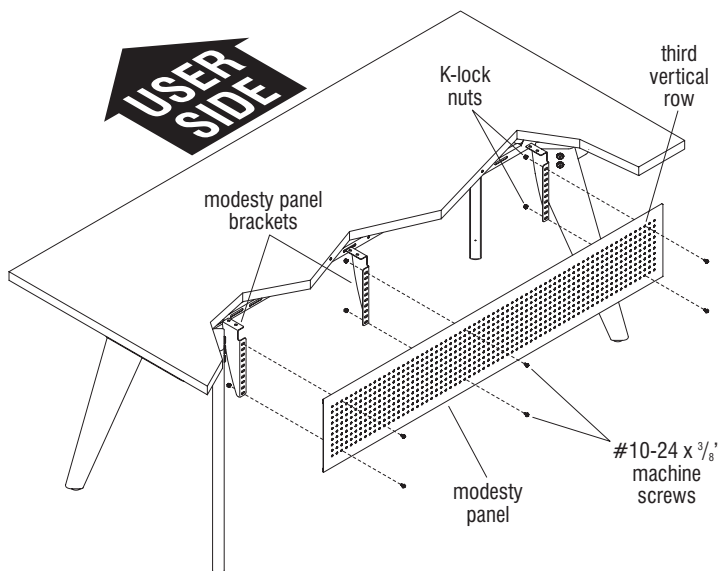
Single Beam Wood Leg Desk - Modesty Panel Installation
